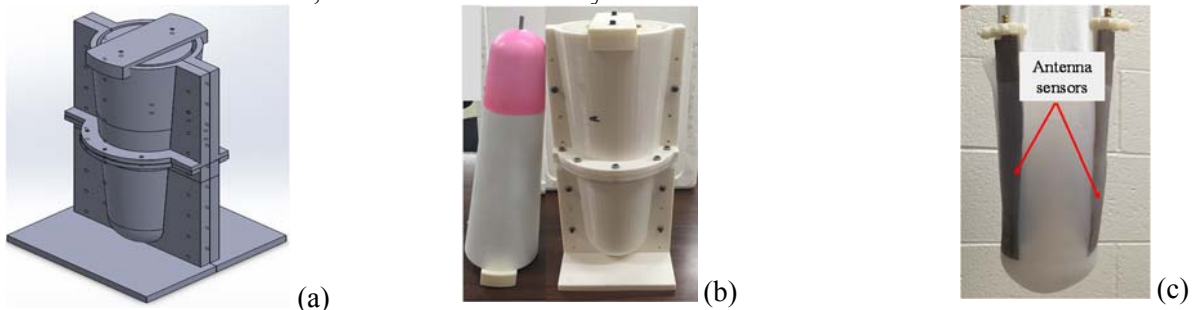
Embed antenna sensors in custom-made prosthetic liner (technique #1); (a) design of the mold for liner fabrication; (b) 3D printed inner and outer mold; (c) fabricated prosthetic liner with embedded antenna sensors.
